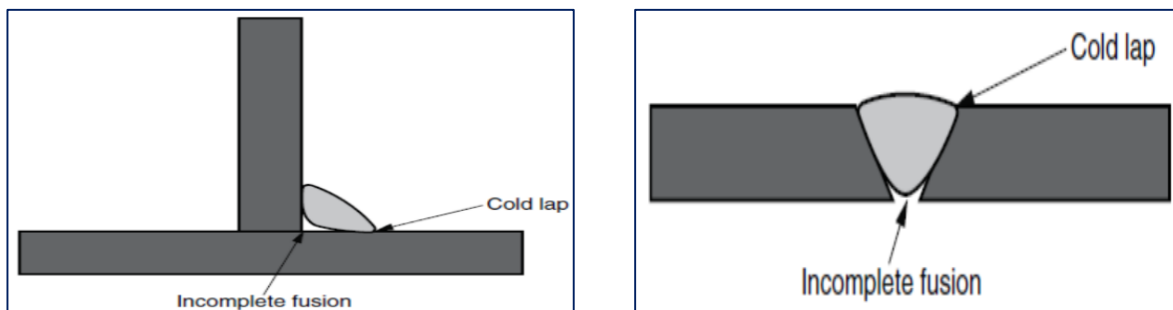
Fillet weld cold laps located on the bottom side of the weld [111]
